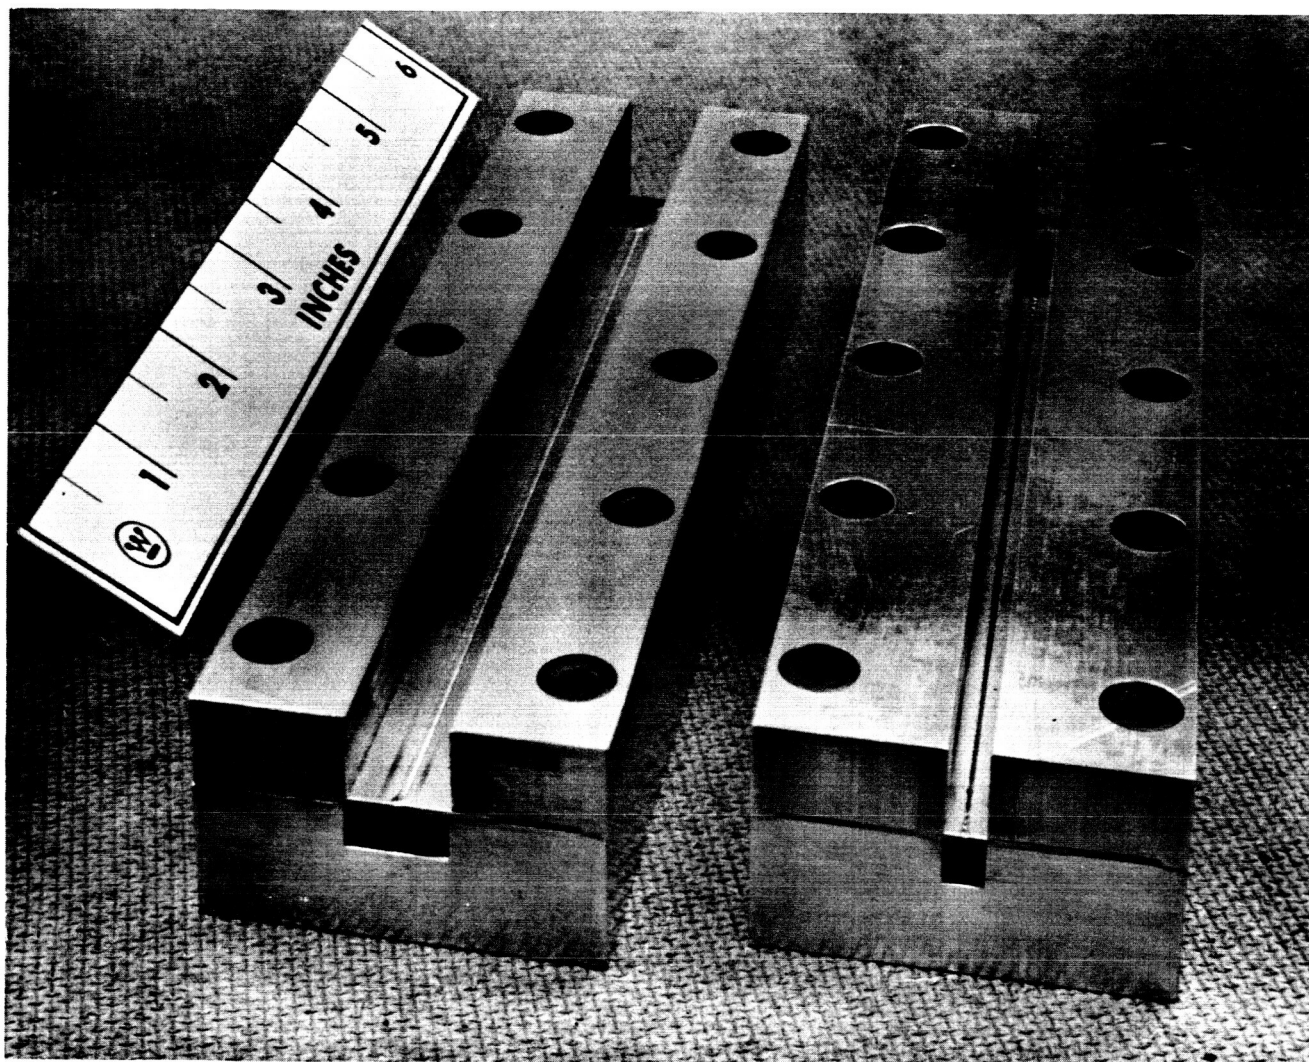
EB Sheet Butt Weld Clamps
